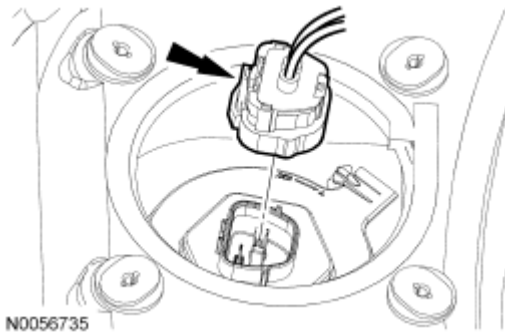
Identifying Fuel Level Sensor Electrical Connector
